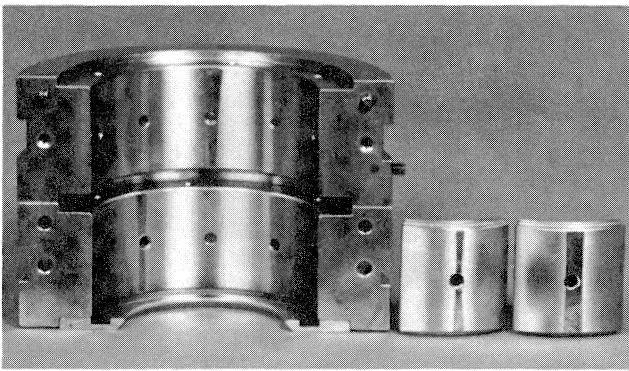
Steel-on-Steel Cylindrical Pivot—Housing and Pad Pivot Wear.
